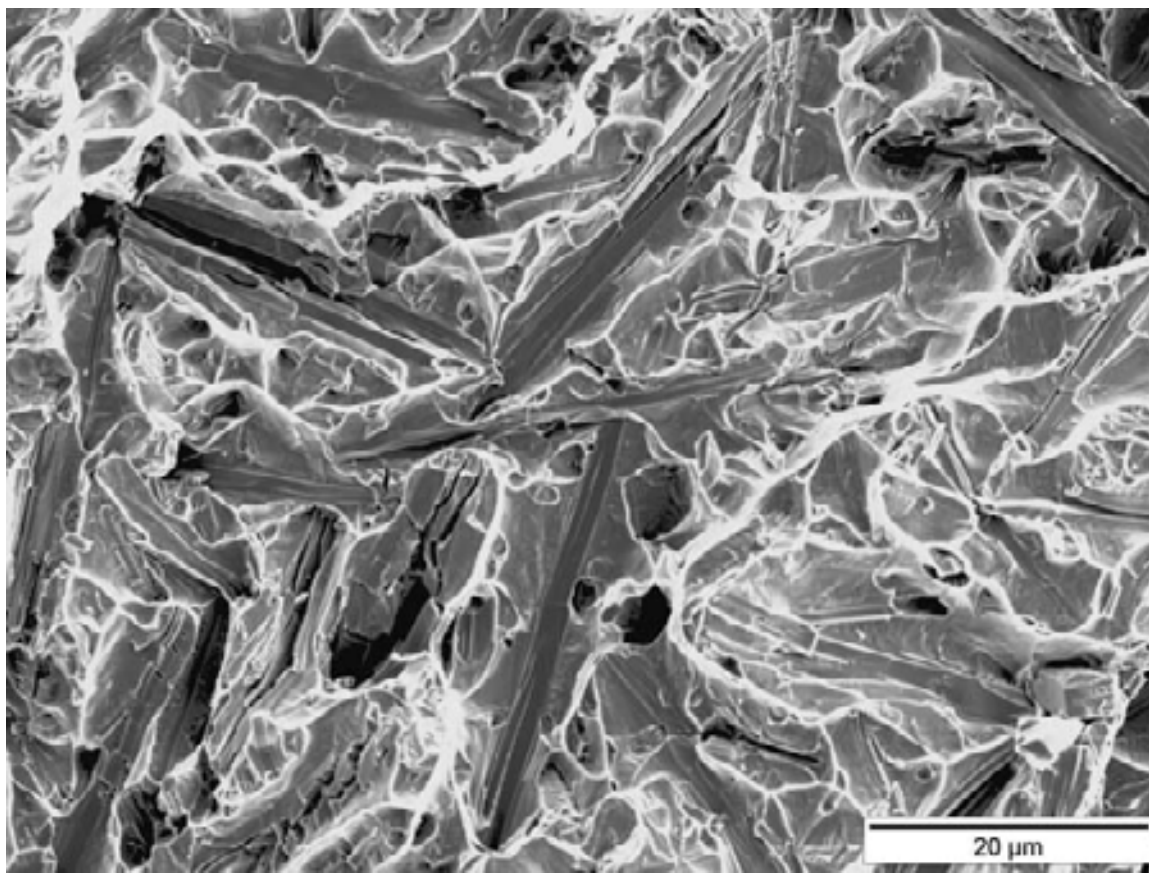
Fracture surface of compacted Ti-6Al-4V-1B modified alloy, showing brittle fracture down the length of the eutectic TiB whiskers and ductile fracture of the Ti-6Al-4V matrix.
